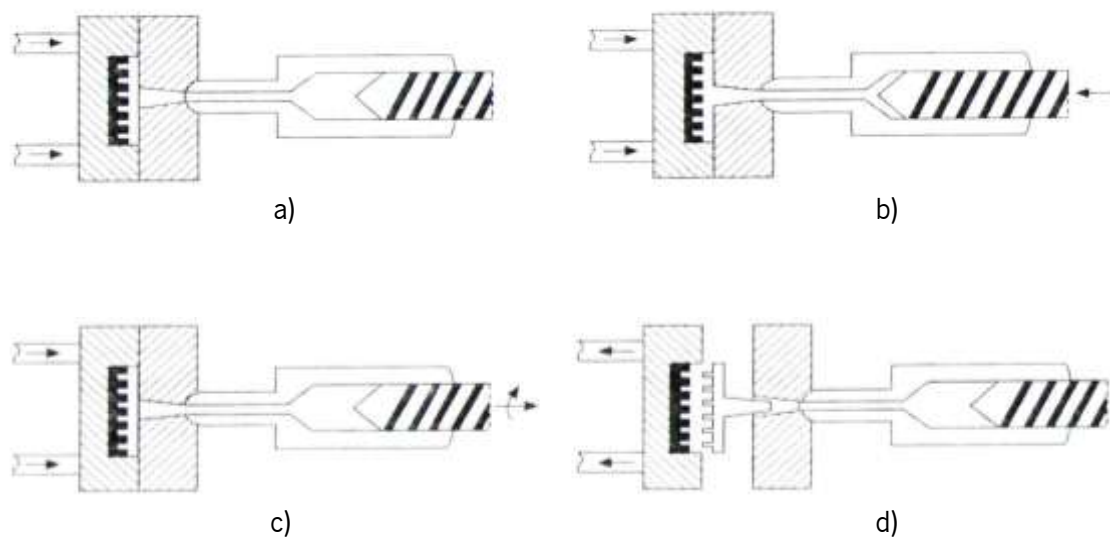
Typical stages involved in microinjection molding: (a) mold closing, (b) injection and holding, (c) cooling and plastication, (d) mold opening and part ejection [122].
